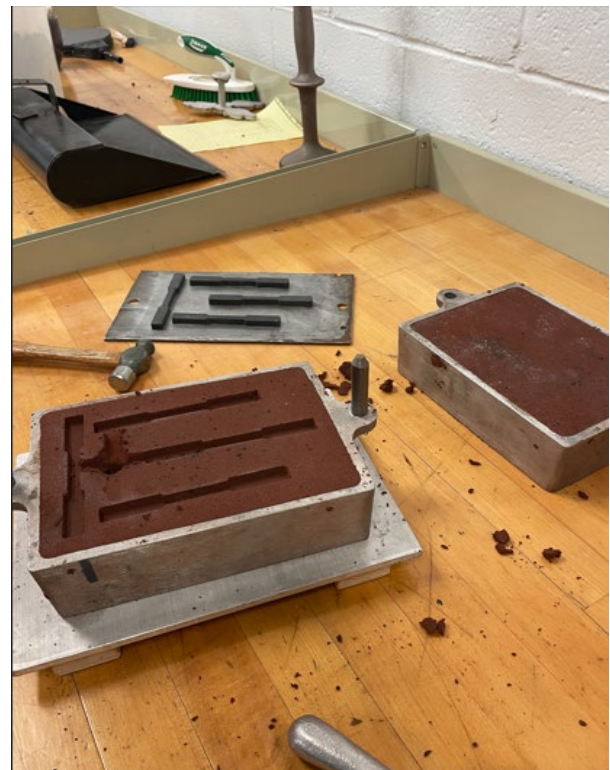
(L): Match plate for sand casting; figure 3(R) Sand Mold
